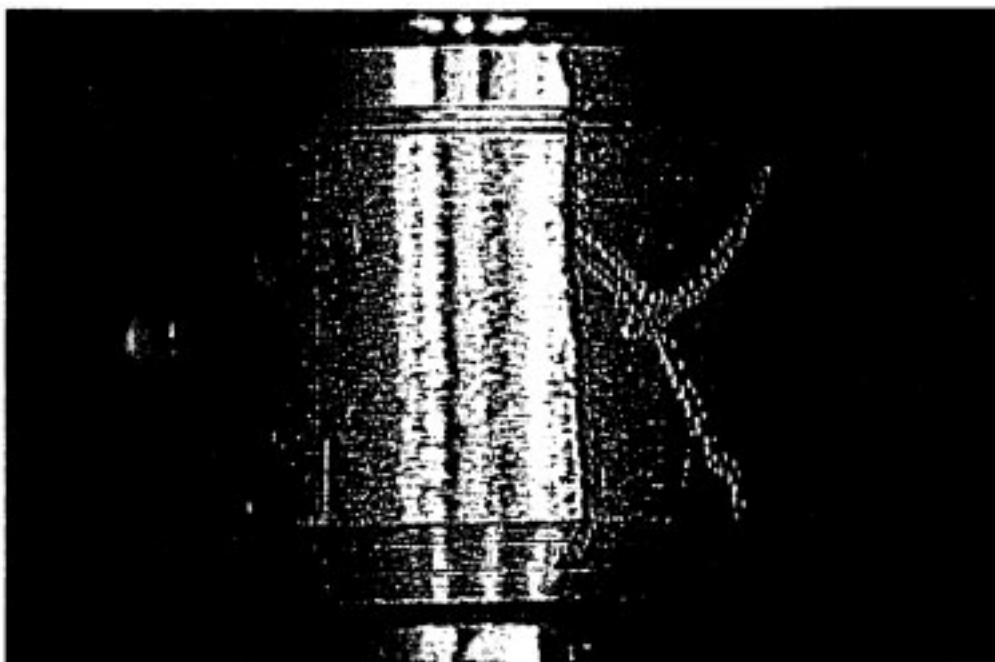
LP Exemplar Pilot Valve Poppet Shaft (view 2)
